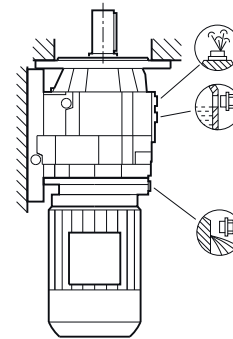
Mounting positions for helical gearbox DB/ZB foot / flange-mounted design, size 29
